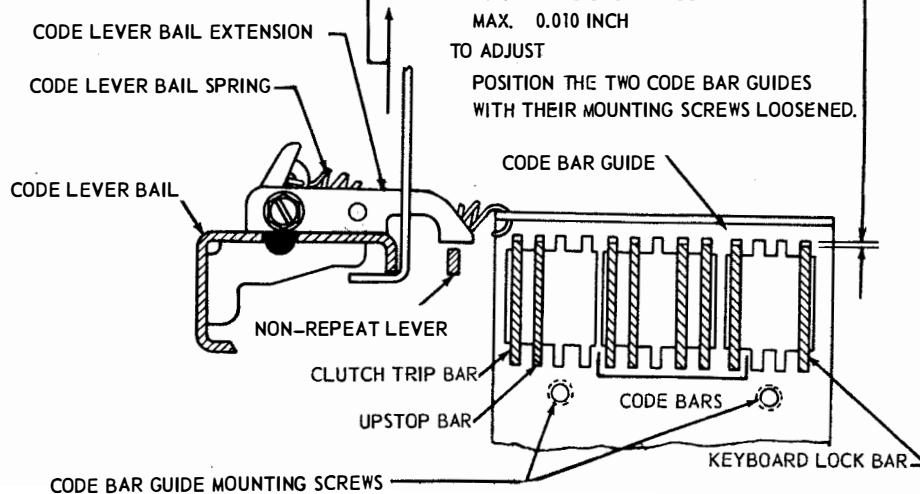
Keyboard, Code Bar Mechanism, Left Side View
